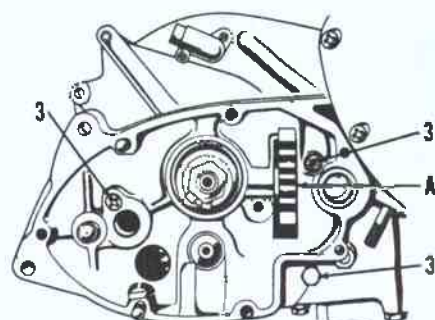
Drawing of inner cover showing the three screws (3) which attach cover.
